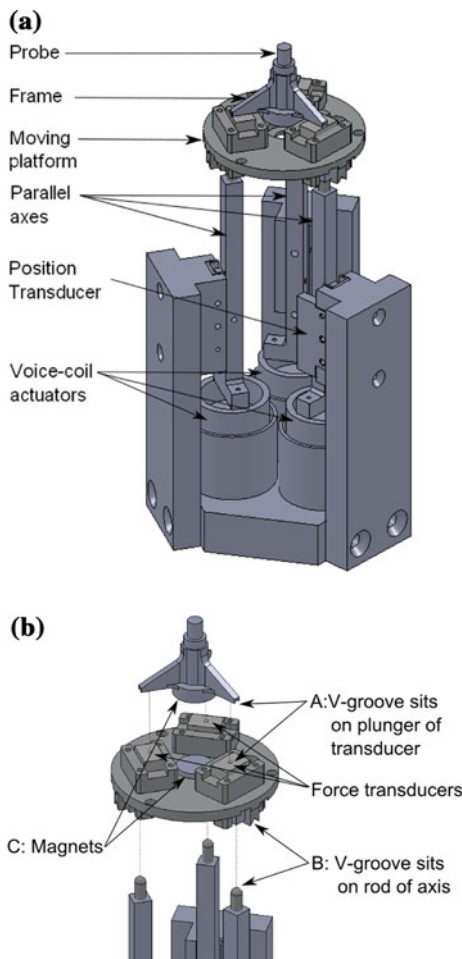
a Force-sensitive micro-robot. b Exploded view of top section of micro-robot
